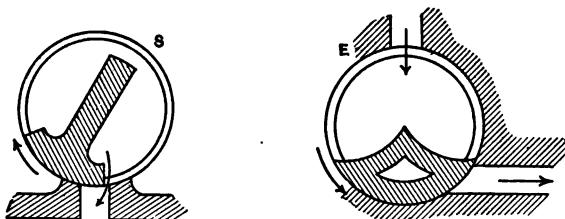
Steam and Exhaust Valves of Corliss Engine.
